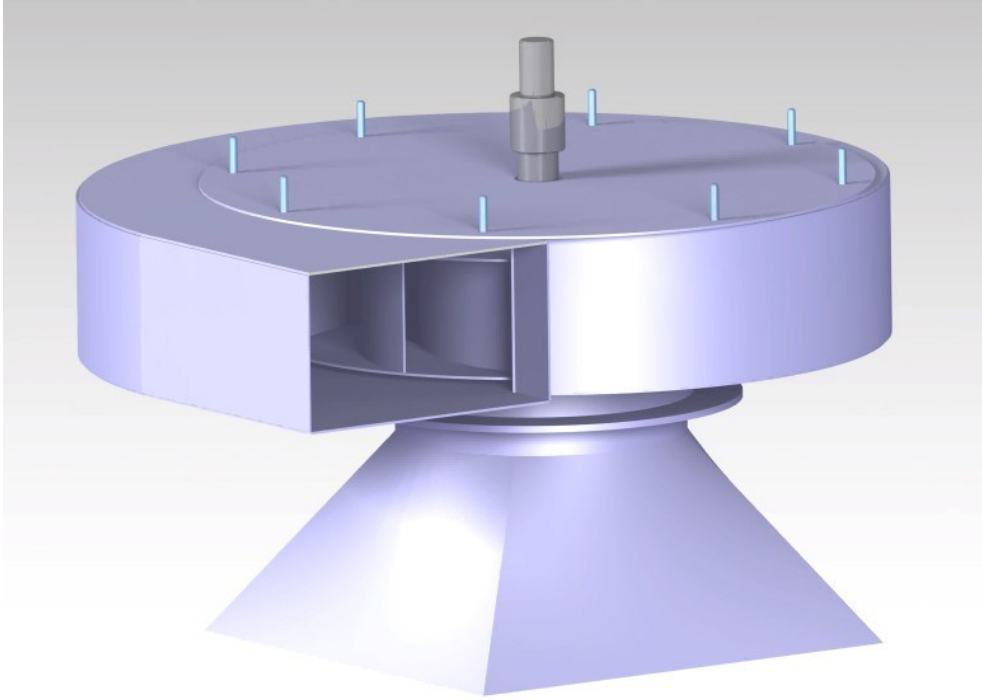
Impeller assembly. The blower lies inside the casing and the impeller's inlet is connected to the diffuser.
